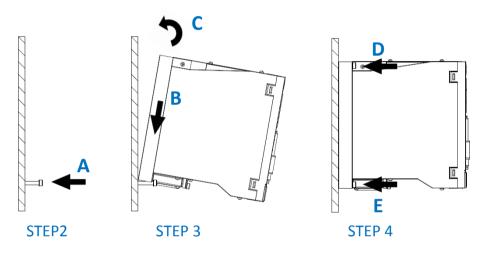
Mechanical Mounting of AMD2000 D2109 Servo Drive
